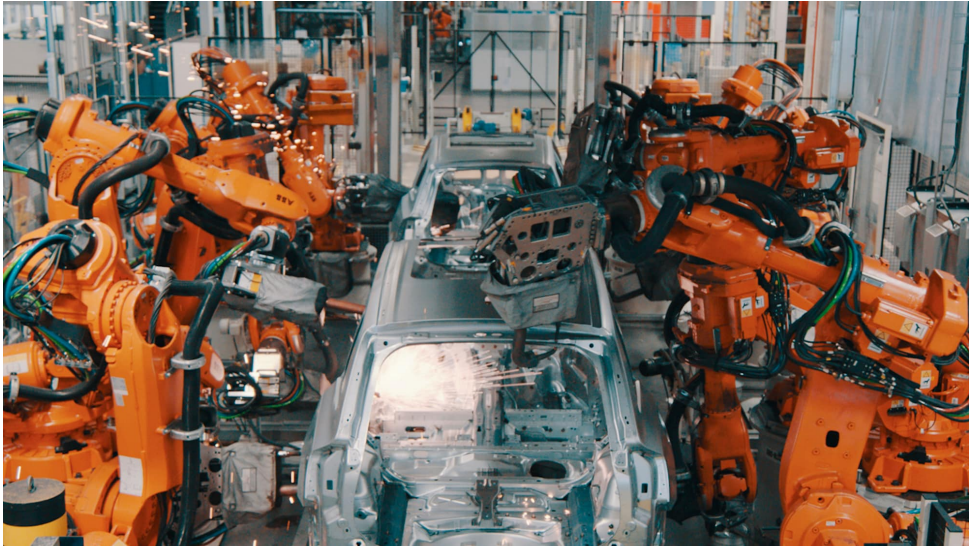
Spot-welding in VCC to join car body parts of a Volvo using ABB robots.
